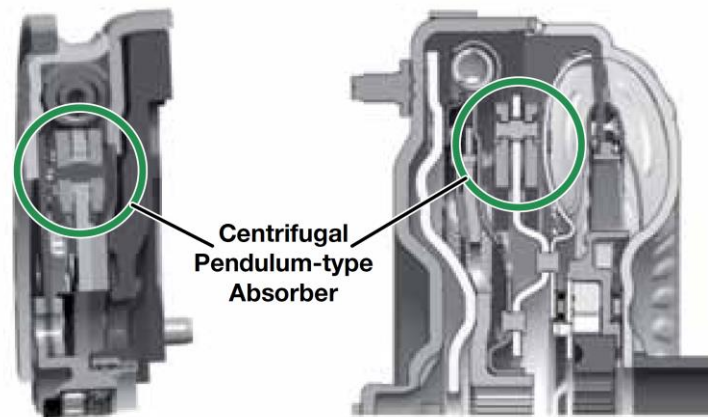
Pendulum absorber integrated into coil spring damper in a DMF (Left) and a Torque Converter (Right) [27]
